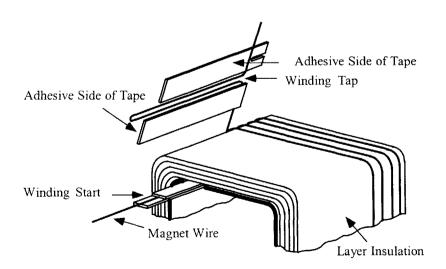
Tap Lead Using Tape: Step 1, Showing the Exploded View.
